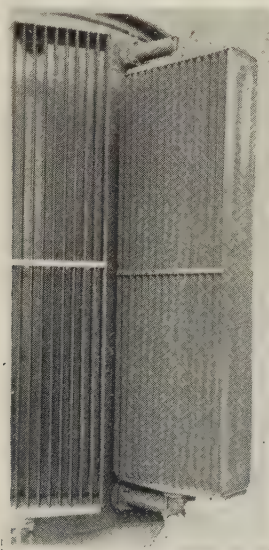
OUTSIDE-EDGE-WELDED TRANSFORMER RADIATOR (W)
